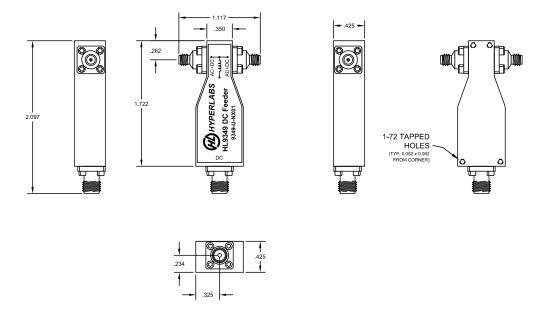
HL9349 with SMA DC bias port Mechanical Drawing
